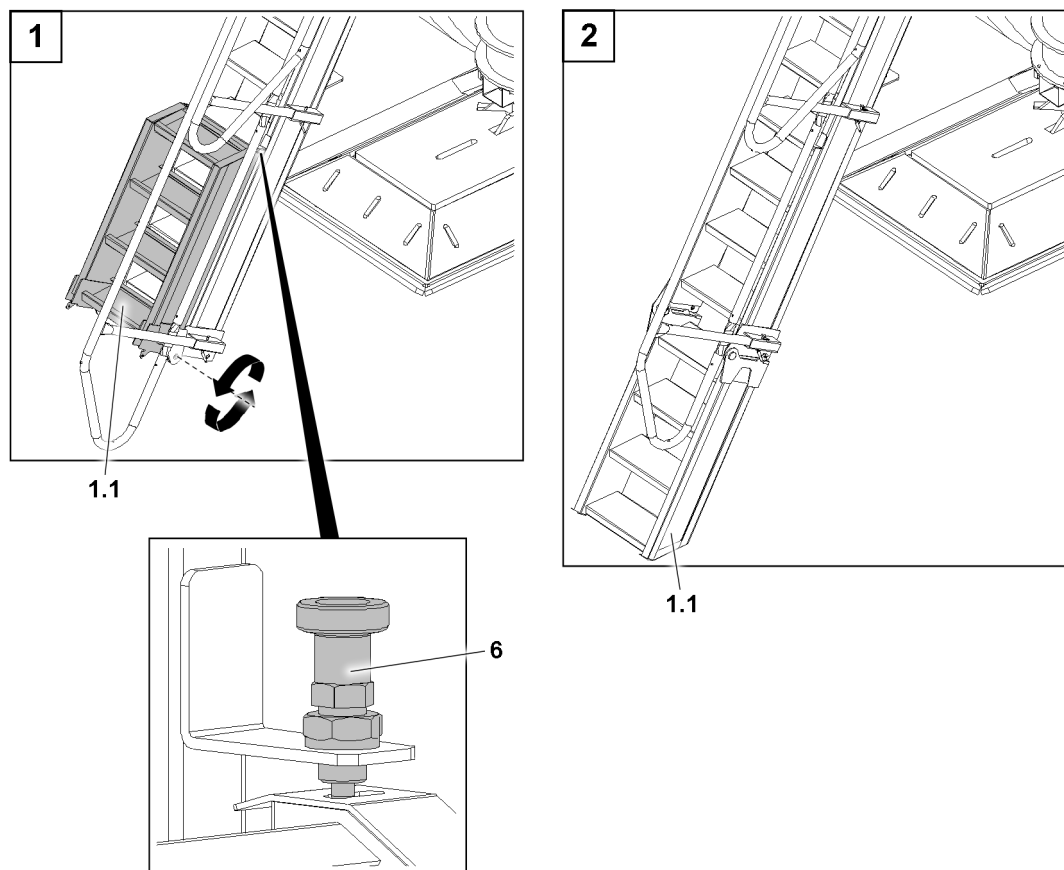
Assembling the ladder in the operating position — folding the lower section of the ladder into the operating position
